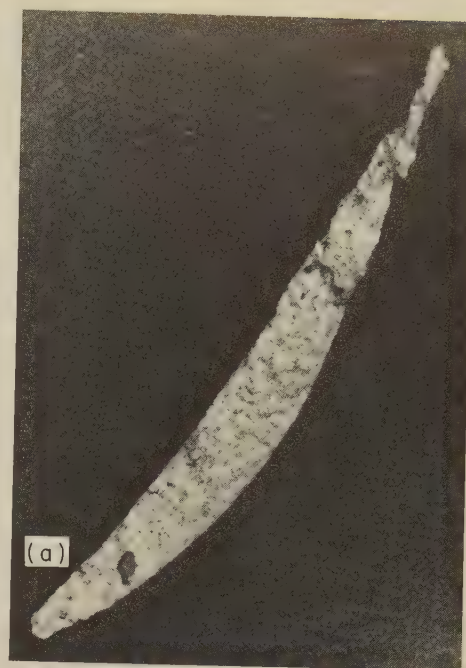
shows a large inclusion in a fracture surface of a cast aluminum alloy A357-T6 blade of a small, high-speed air turbine and two views of the fracture-surface features around this inclusion.
